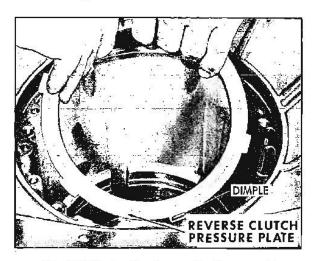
B-119 Installing Reverse Clutch Pressure Plate
